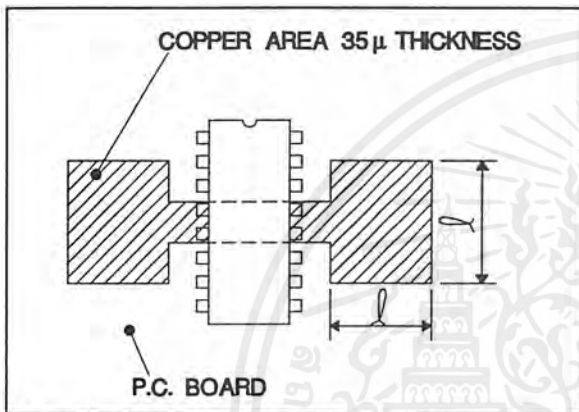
Example of P.C. Board Copper Area which is used as Heatsink
